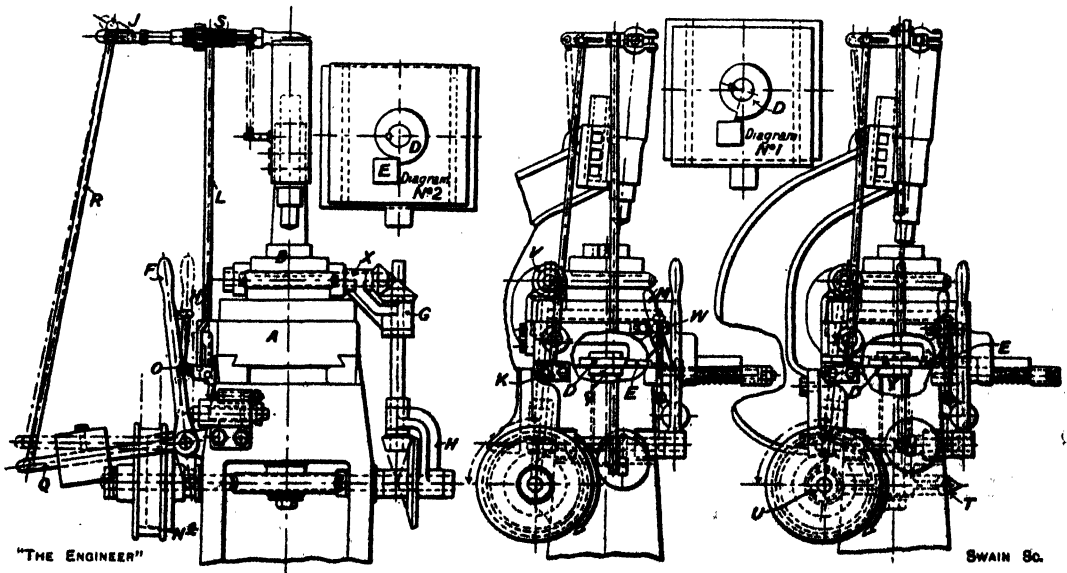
DIAGRAMS 1 AND 2—MECHANISM OF DIE-BATTERING MACHINE.
